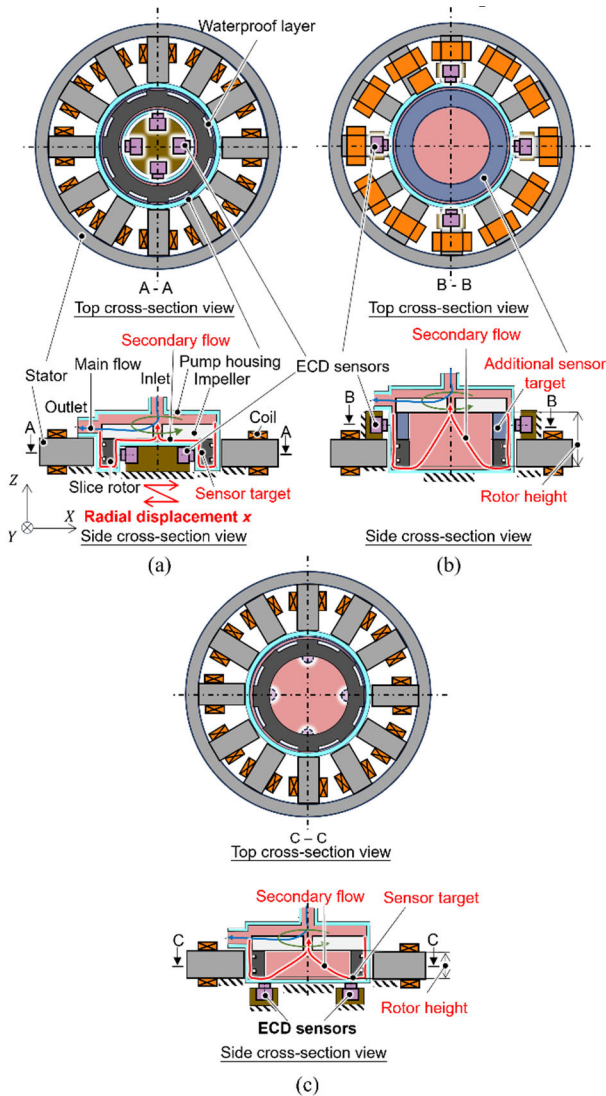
CBP utilizing a BELRSM with different sensor placements: (a) Pump head structure with the sensor placement inside the slice rotor; (b) Pump head structure with the sensor placement outside the slice rotor; (c) Pump head structure with the proposed sensor placement under the slice rotor.
